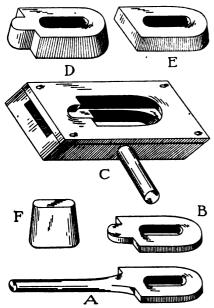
PUNCHING PLATES USED IN MAKING CAR DOOR STOPS. A. B.—FINISHING UP THE PIECE.
